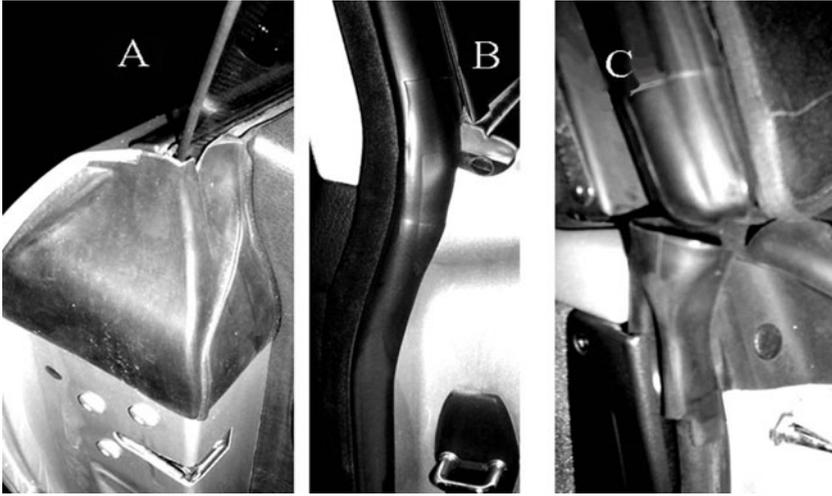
A: molded weather strip node on frameless window door; B: in the connection area between glass and door inner panel, weather strip snapped onto the body pillar undergoes relevant curvature changes; C) a molded funnel to collect and drain water entering between glass and body side is included in primary seal.
